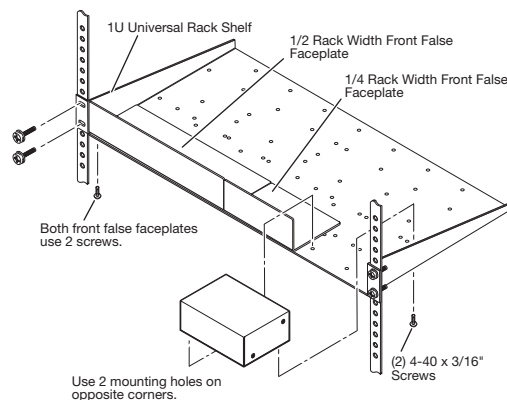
Mounting the Unit on the RSU 129 Universal Rack Shelf
